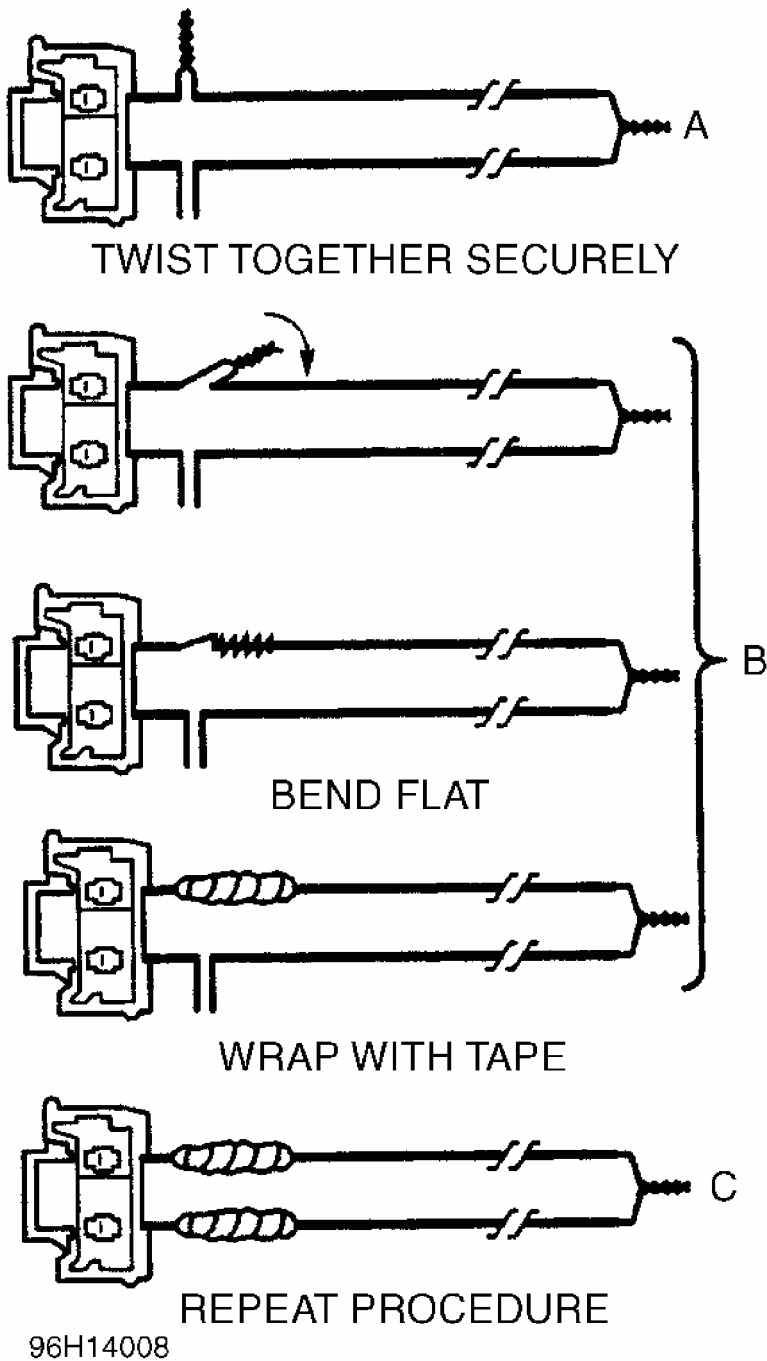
Preparing Deployment Harness For Side Impact Air Bag Module
